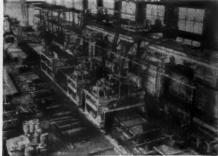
Hopper car held inverted in "turn-over" type fixture to allow fast, low-cost arc welding with "Automatic Lincolnweld" process.
